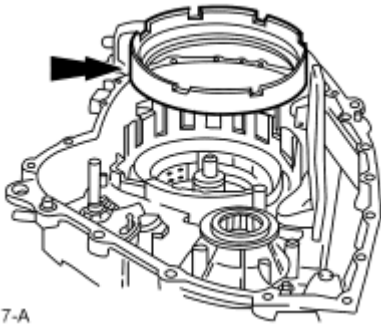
Low/Reverse Clutch Return Spring Assembly
